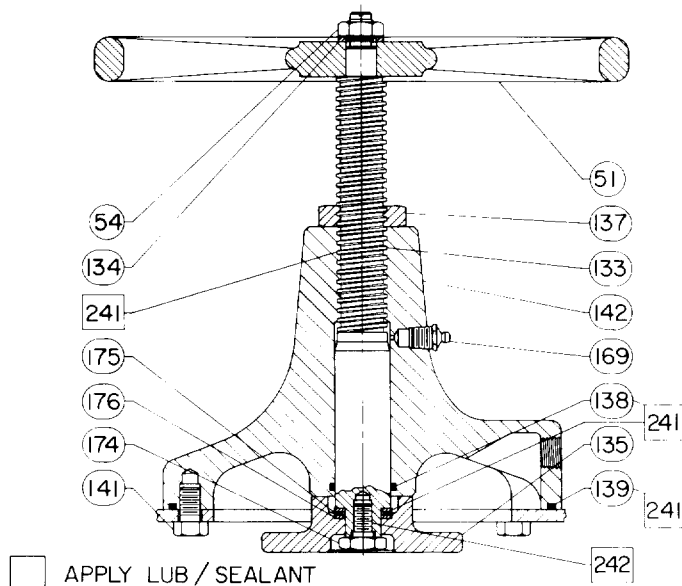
Top Mounted Handwheel Assembly for Size 70 and 87 Actuators
